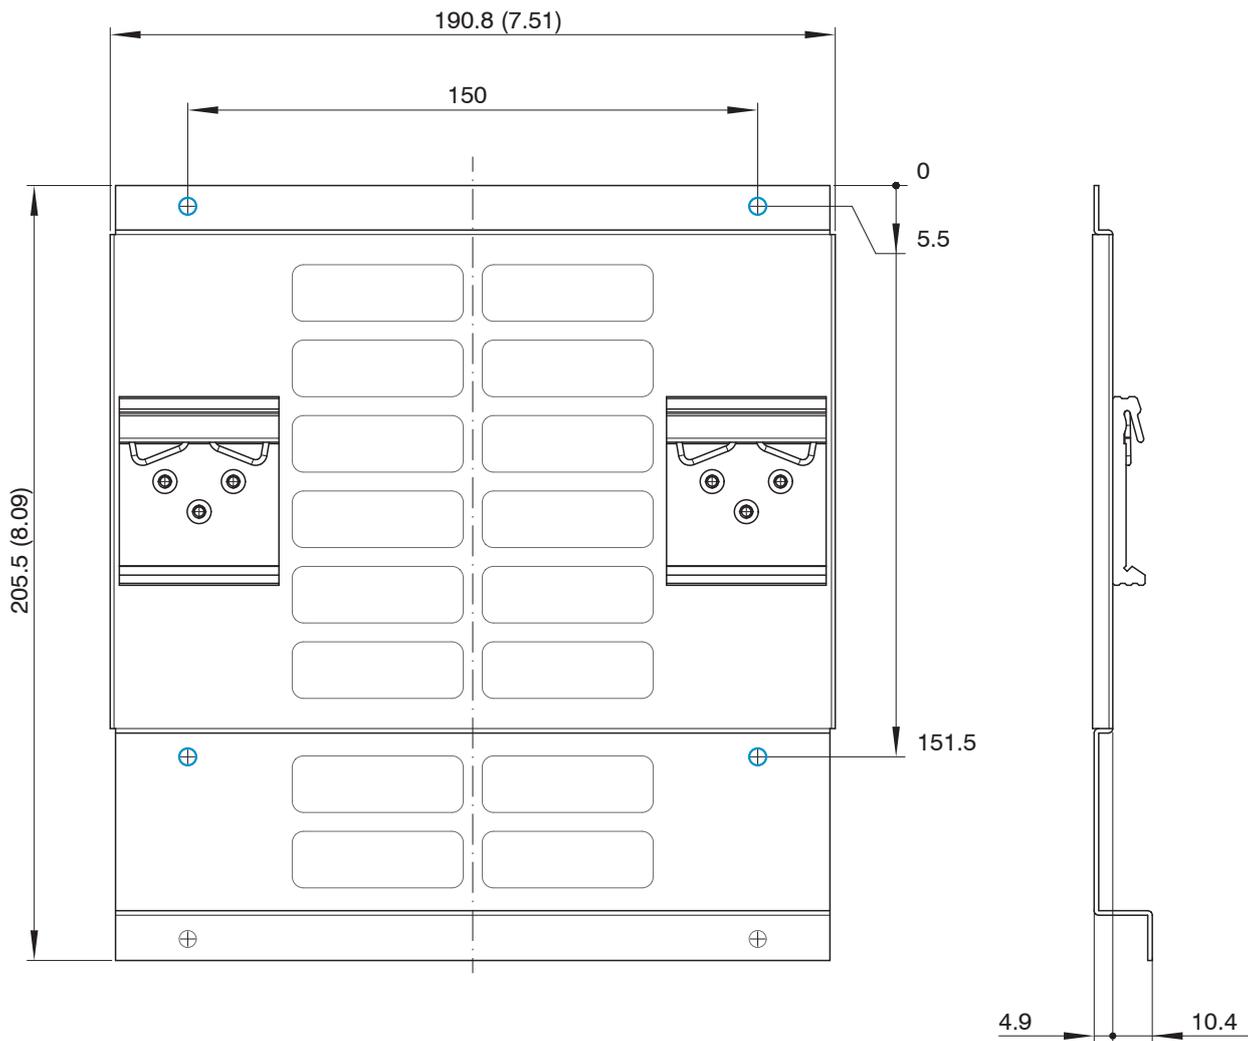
Dimensional drawing of mounting plate for DIN rail installation, dimensions in mm (inches, rounded off)
